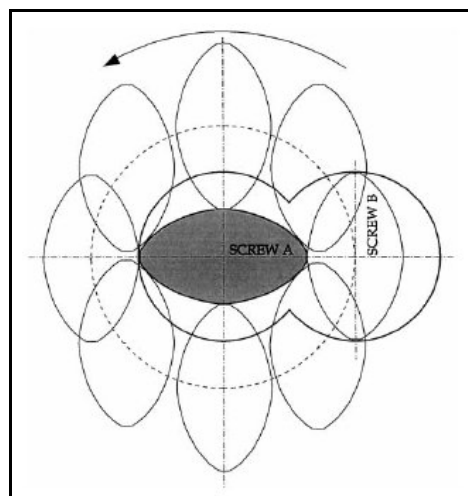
13. Relative motion of the screws of a co-rotating extruder [42].
